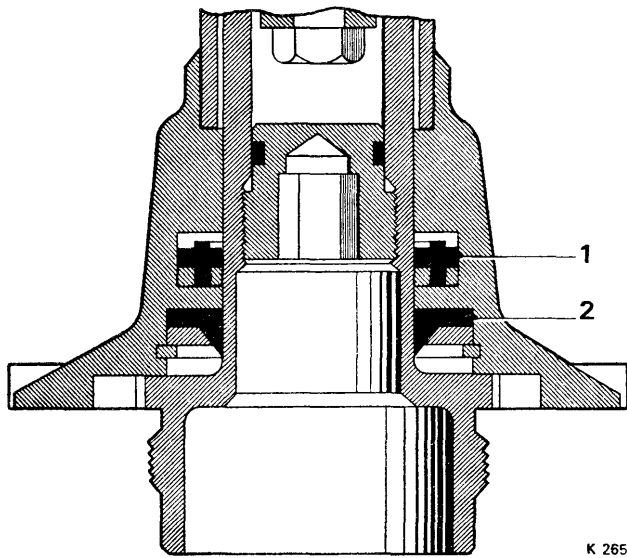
SECTIONAL VIEW—LATER SEALING ARRANGEMENT—HEIGHT CONTROL RAMS
